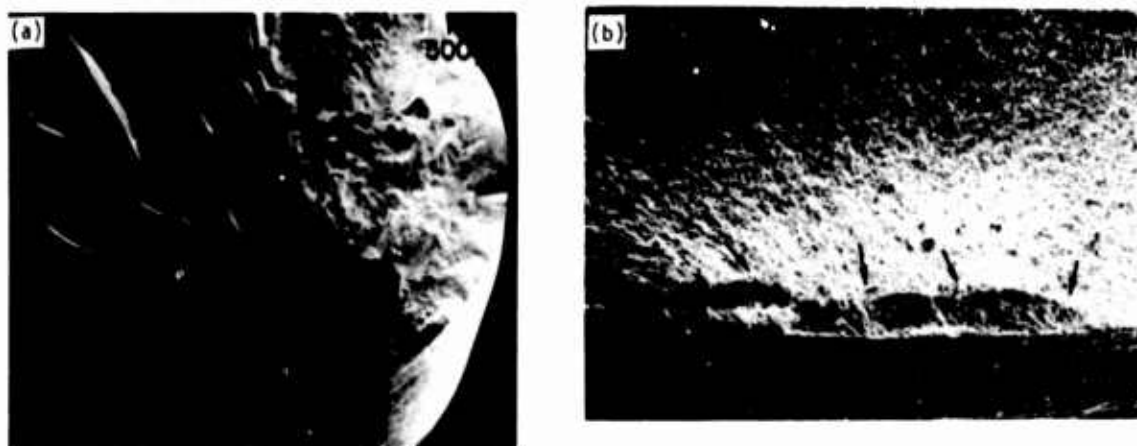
Machining flaw fracture origin in hot press Si_3N_4 (HS130). Note that the circumferential machining of this round tensile specimen is again perpendicular to the tensile axis and even on a shaped specimen results in an elongated flaw shown in (b).
